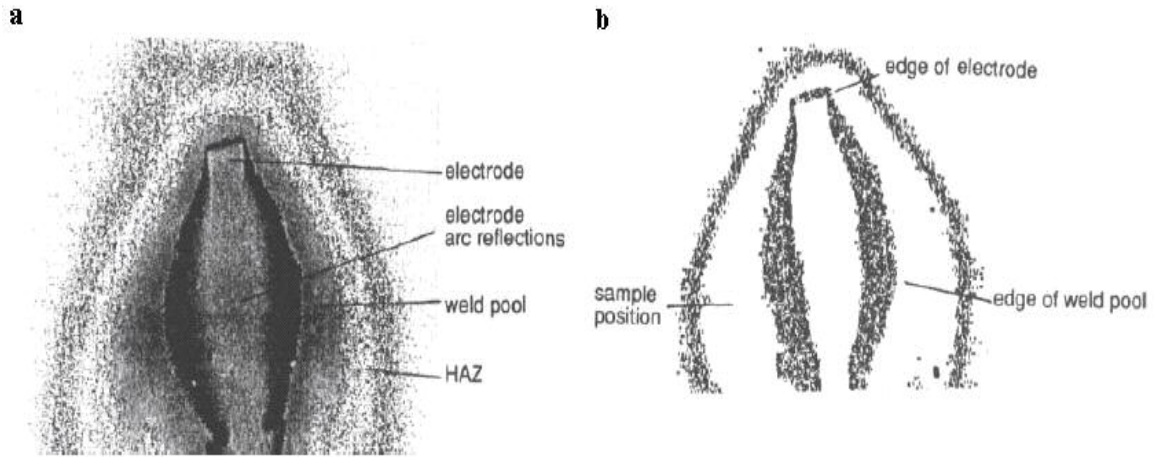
(a) Front face image of a pulsed TIG weld on 3 mm stainless steel from an infrared camera (b) Filtered and threshold image of a 3 mm pulsed TIG weld [14]
